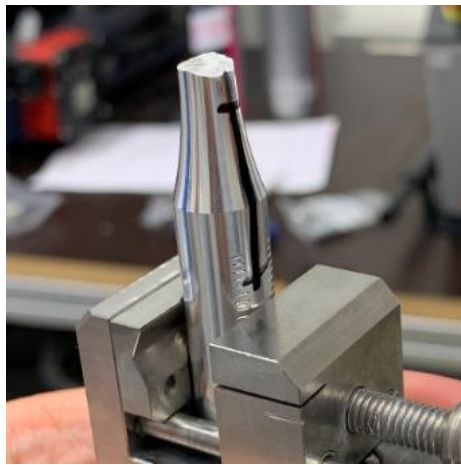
Fatigue test specimen of high-strength aluminium alloy
